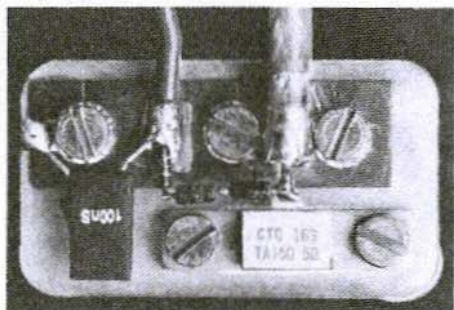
Terminating resistor, diodes, and charge capacitor. It is not absolutely necessary to mill the mounting surface.
